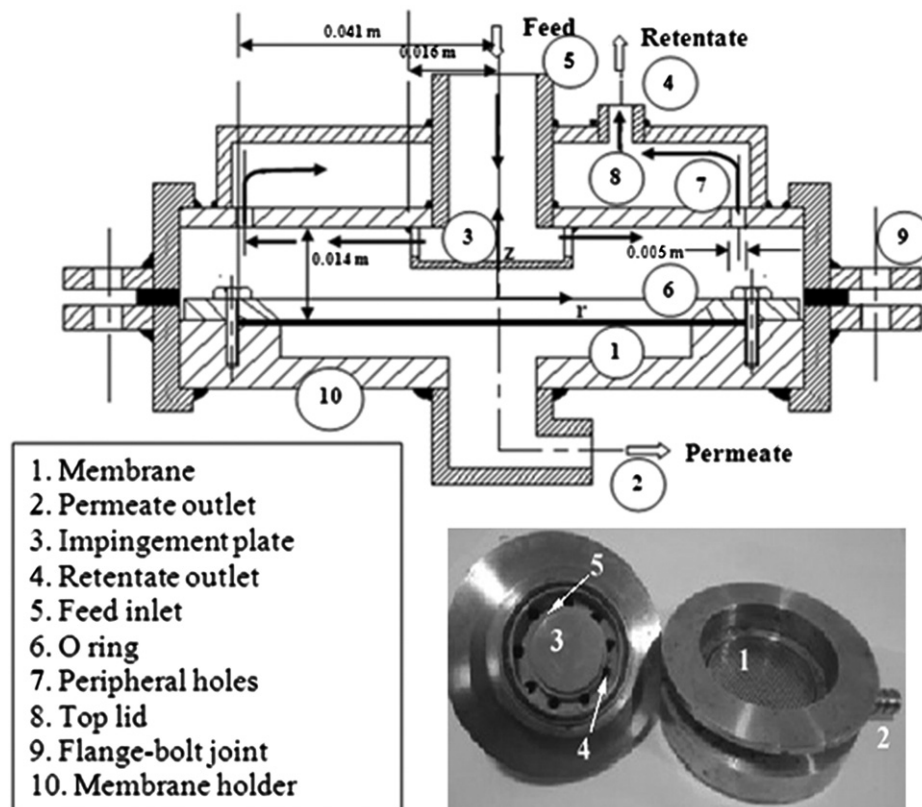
Sectional view of the radial flow membrane (RFM) module (insert showing the photograph of the module internals).
